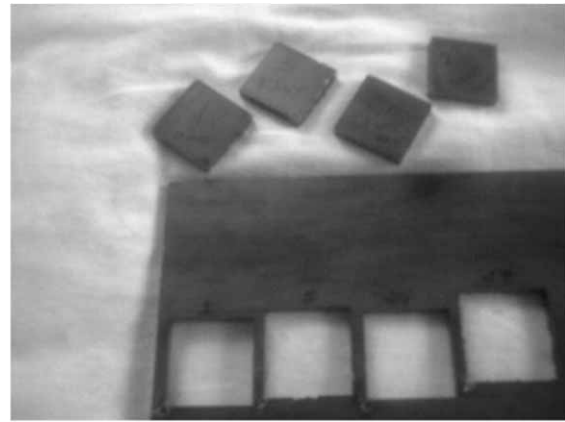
ytterbium laser machining is done on 5 mm thick EN353 steel.
